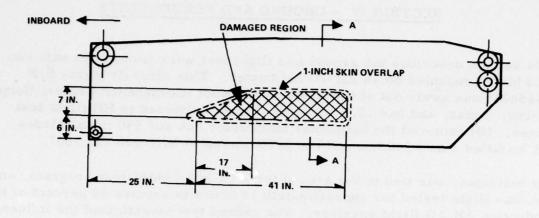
S/N-002 MTS blade damage resulting from fatigue fixture accident.
